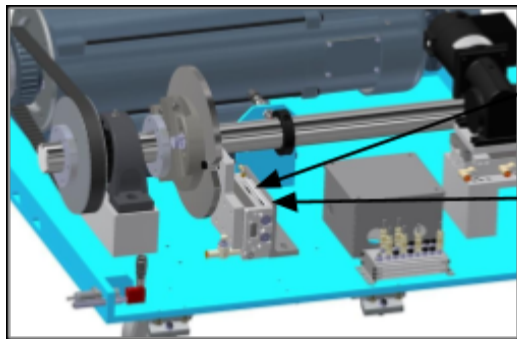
Spindle Index, Spindle Gear Motor Engage/Disengage
